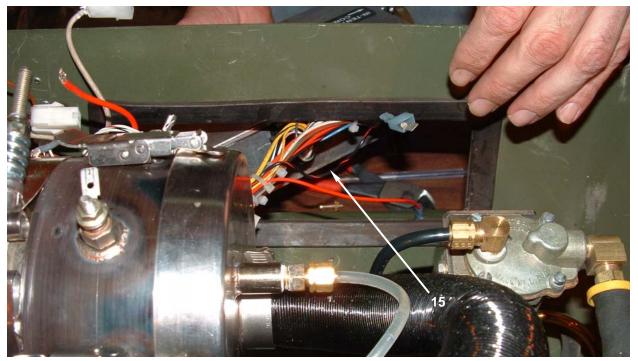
Replace the Electronic Box Assembly, Complete With Wire Harness – Disconnect Remaining Connections and Remove Assembly.
